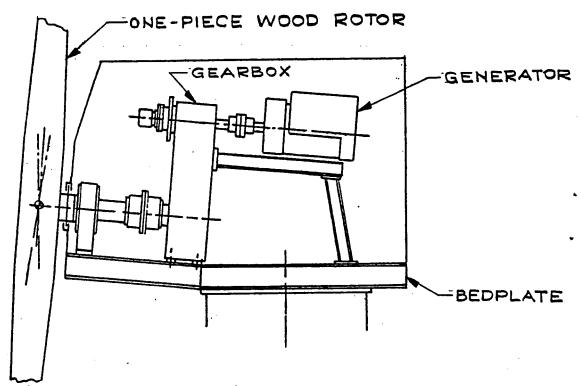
Concept 5: Single bearing support for rotor with partially tilted bedplate to reduce rotor over hang and bedplate length
